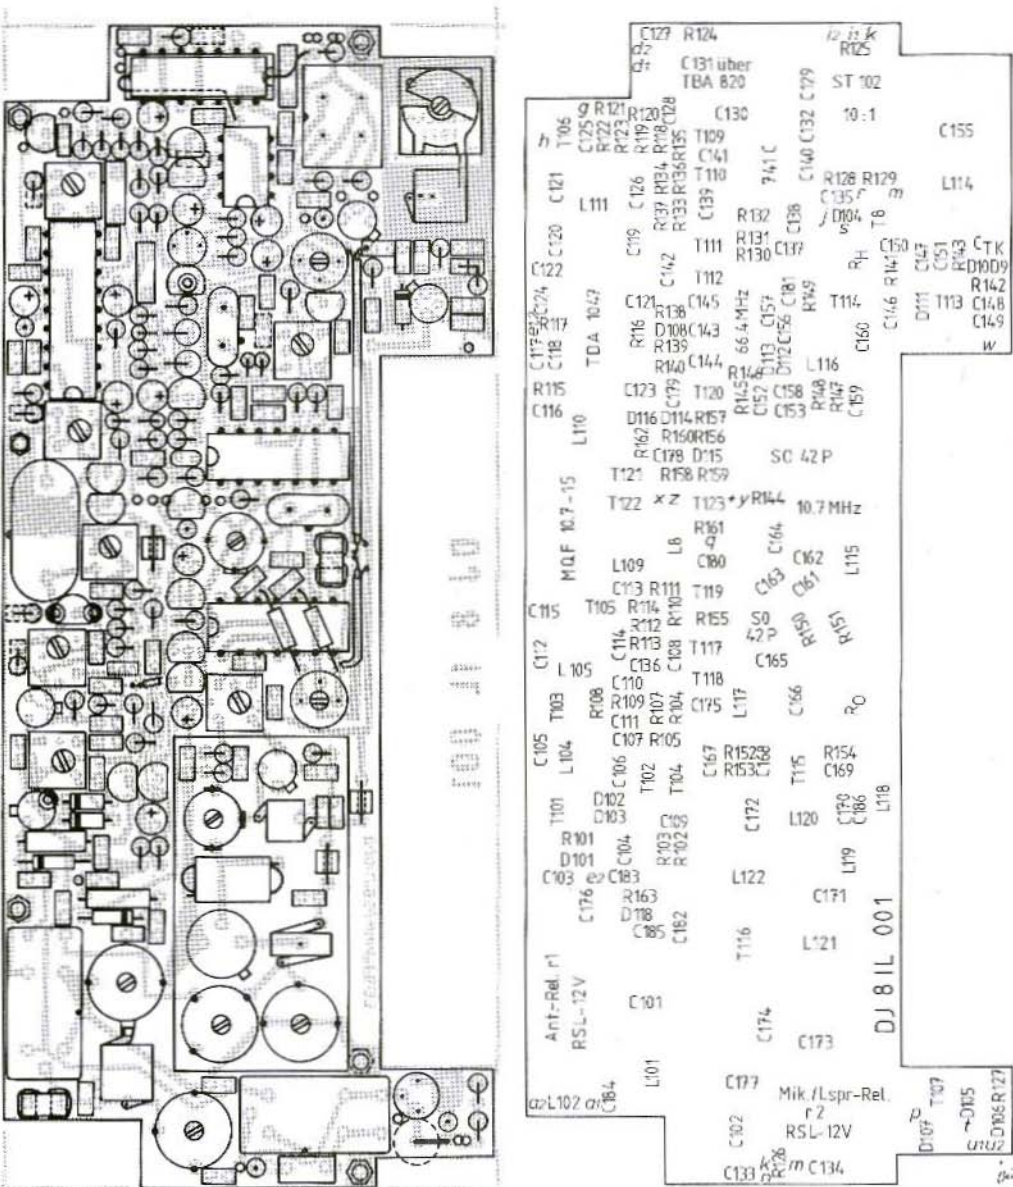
PC-board DJ 8 IL 001 (RF/AF board) with component locations. R 106 (100 kΩ miniature) is not on this board; it has to be soldered on the copper-lane side, in parallel to C 106.
